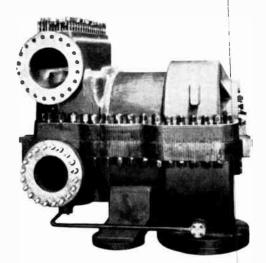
Welding applied to a high-pressure high-temperature turbine casing
